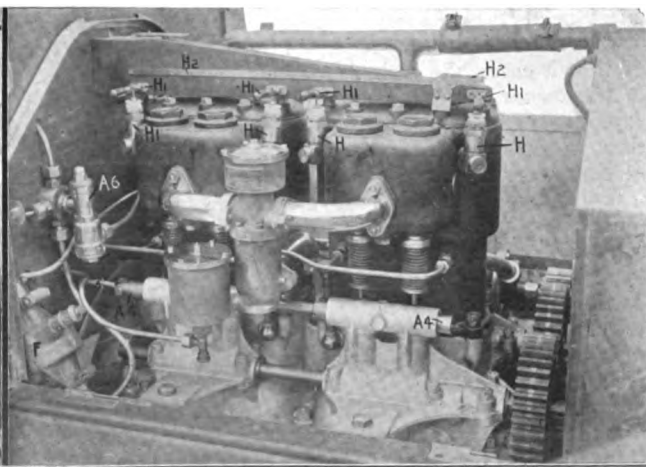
View of the Engine—in place on the Brotherhood Chassis—from the “off” side, showing the automatic Carburettor, the Ignition-plugs with their Switches, the Pressure-valve, and the Variable-lift Mechanism for the Inlet-valves.
